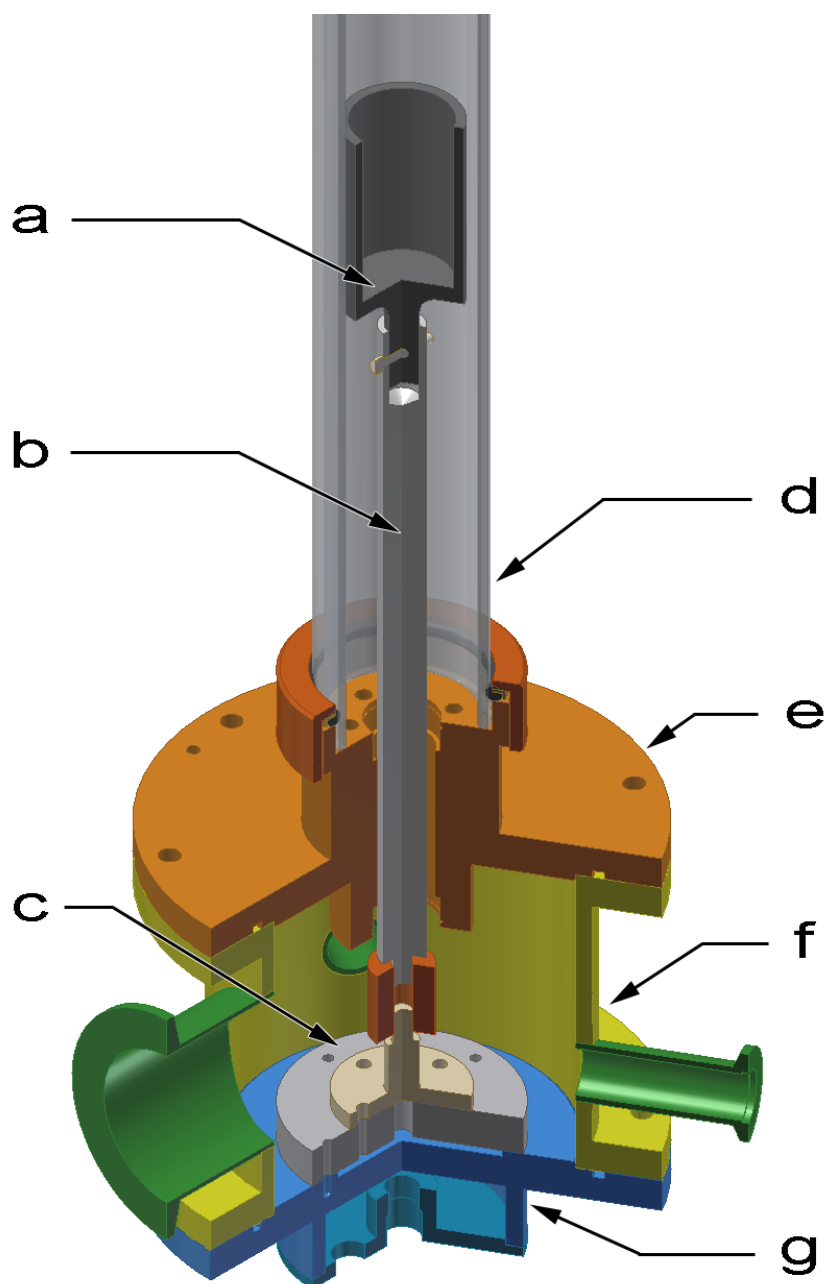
Cross section view of the lower vacuum chamber with the following parts labeled: (a) shear cell cup, (b) cup shaft, (c) torque sensor, (d) quartz glass tube, (e) upper recipient flange and glass seal, (f) main recipient and inlets, and (g) lower water cooled recipient flange.
